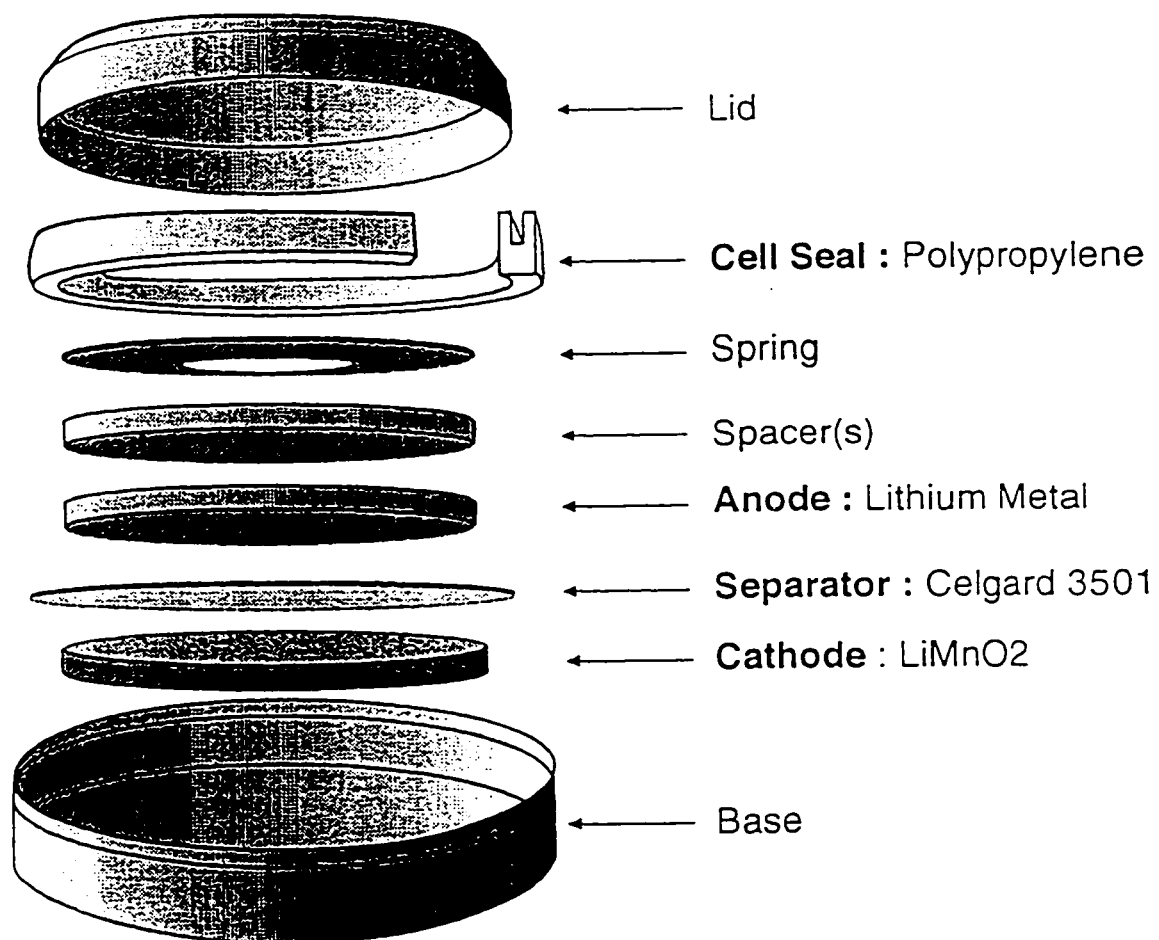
Exploded view of coin cell assembly with spring and spacers.
